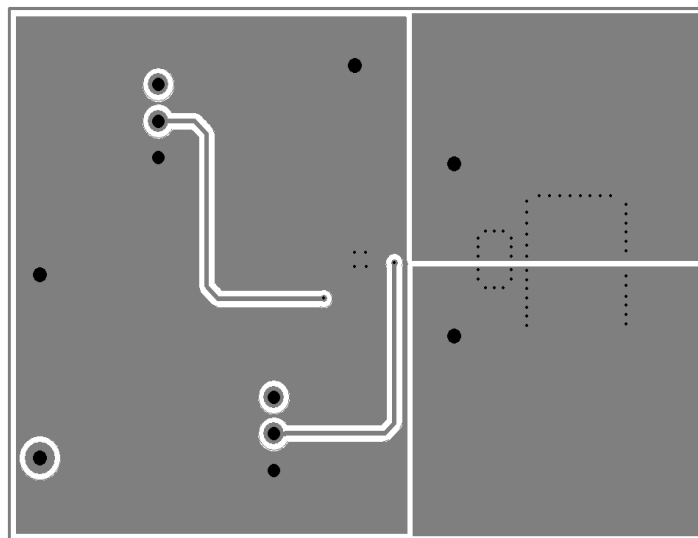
SP7686AEB PC LAYOUT BOTTOM SIDE
